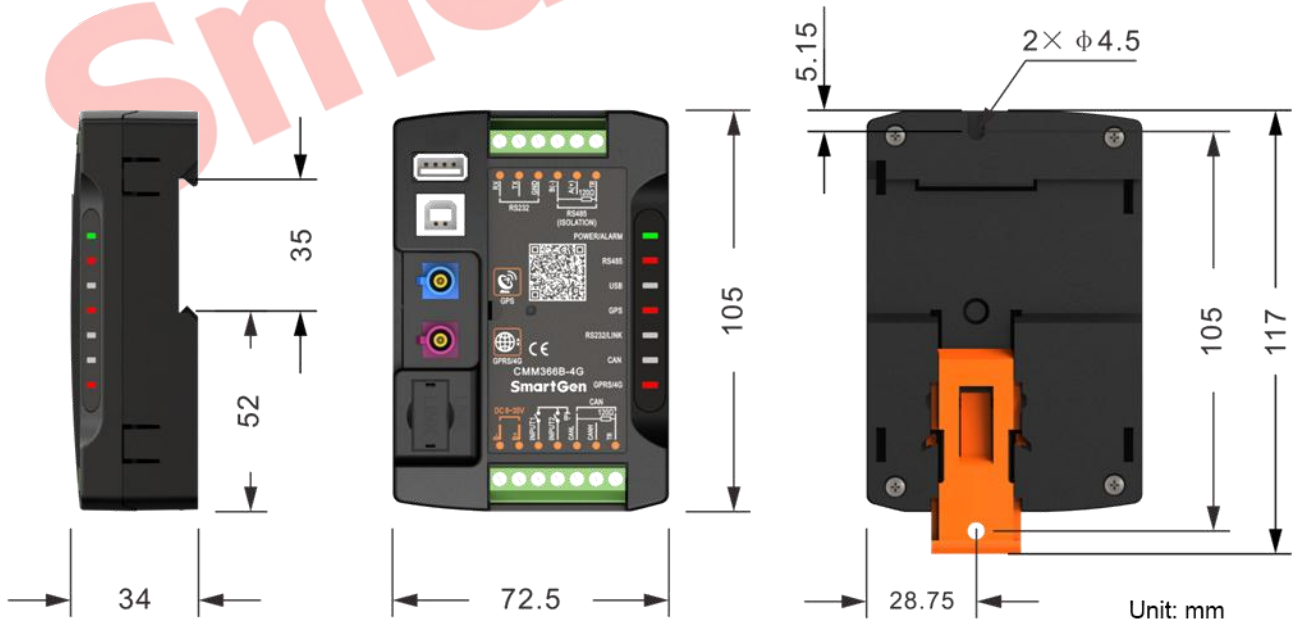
CMM366B-4G/CMM366CAN-4G Case Dimension
